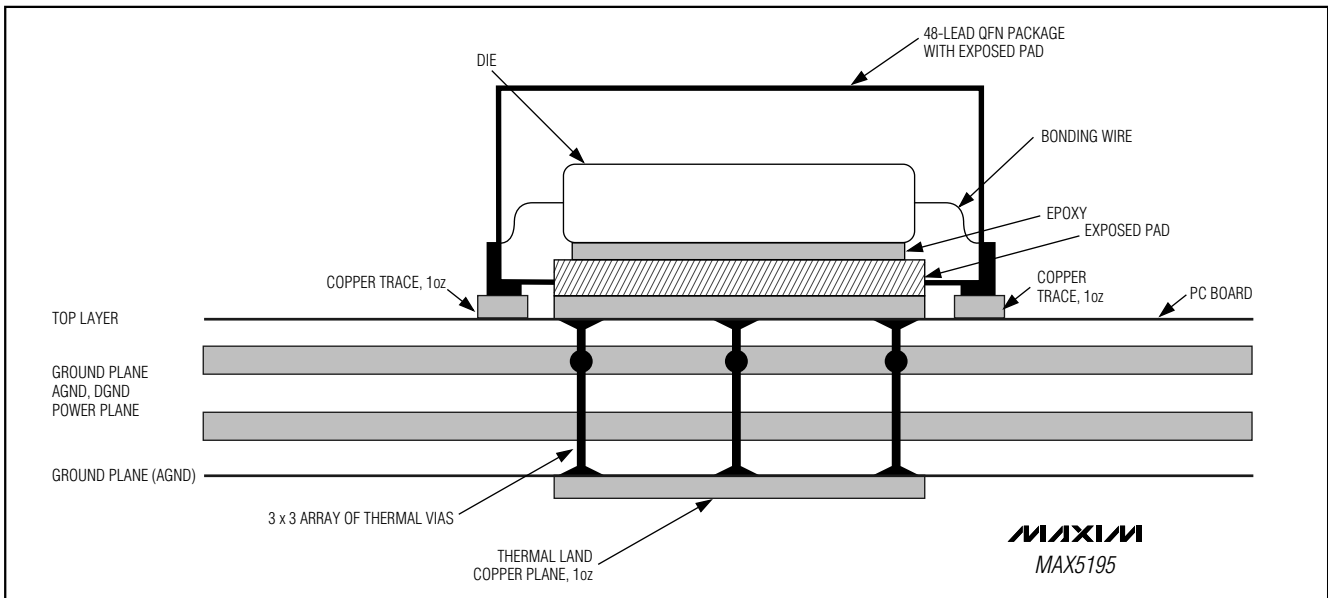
MAX5195 Exposed Paddle/PC Board Cross Section
